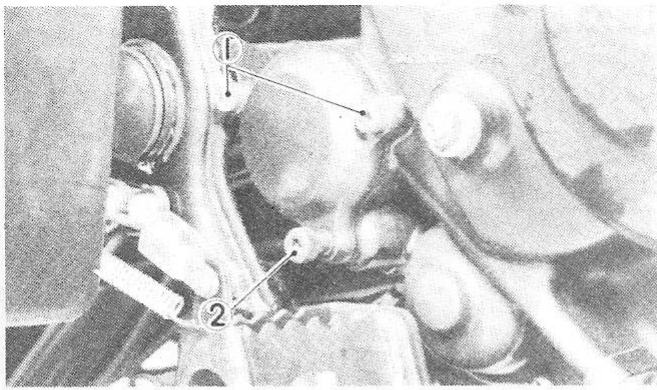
When draining the oil on four stroke models, remove the lower bolt (2) as well as the drain plug; remove the remaining bolts (1) to gain access to the filter (Sec 9)
